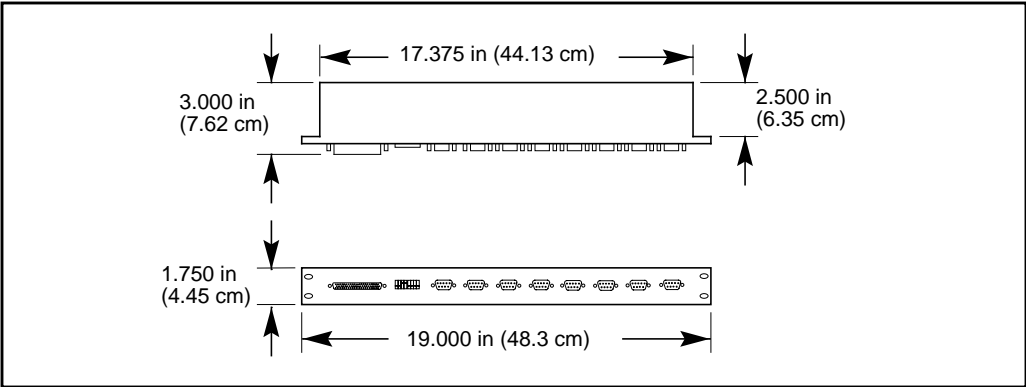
Dimensions of the RS-422 Connector Panel for Rack Mounting
